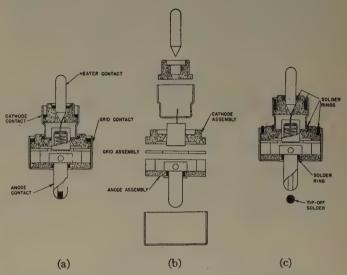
Cross-sectional views of the L-29 and its sub-assemblies.
